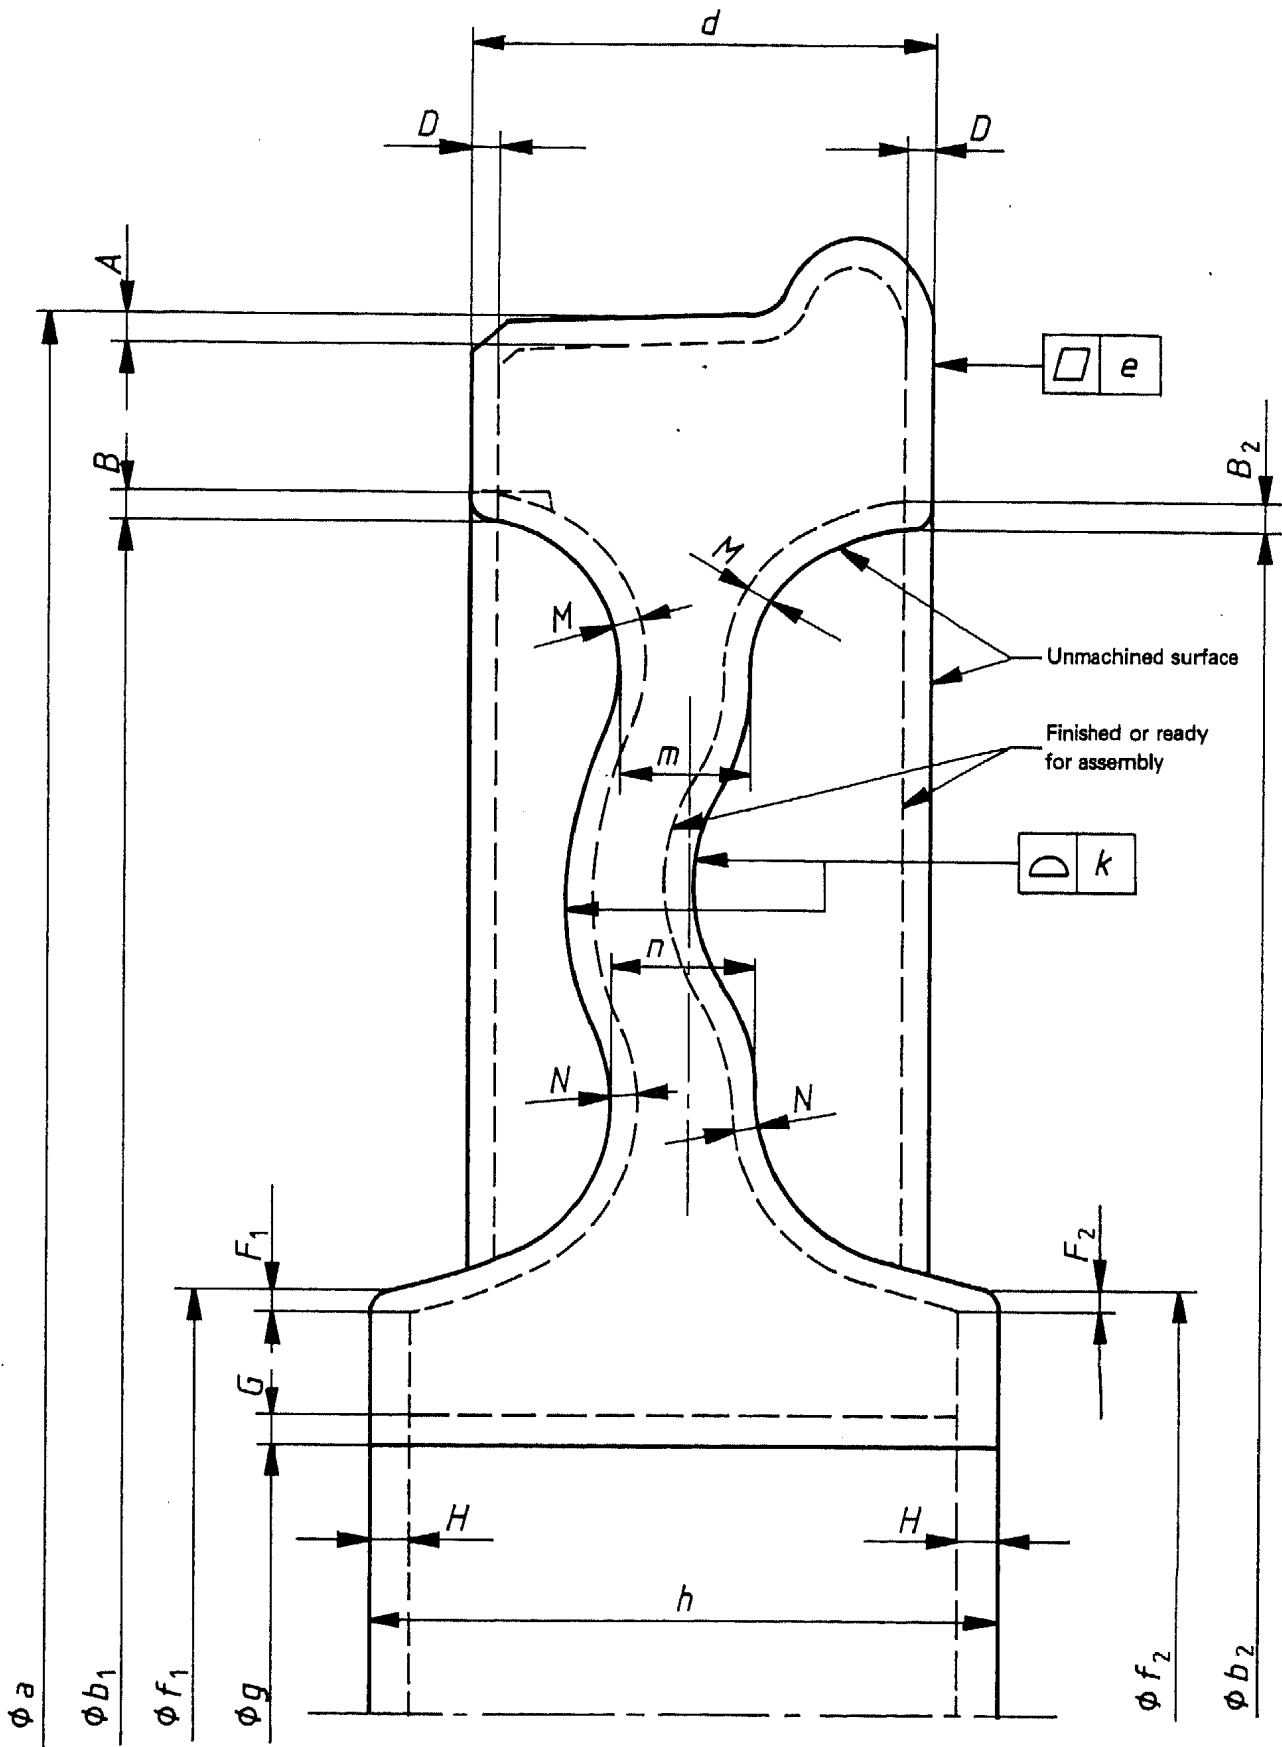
Symbols for the dimensional characteristics, specified in table 3, for unmachined portions of forged or rolled solid wheels
